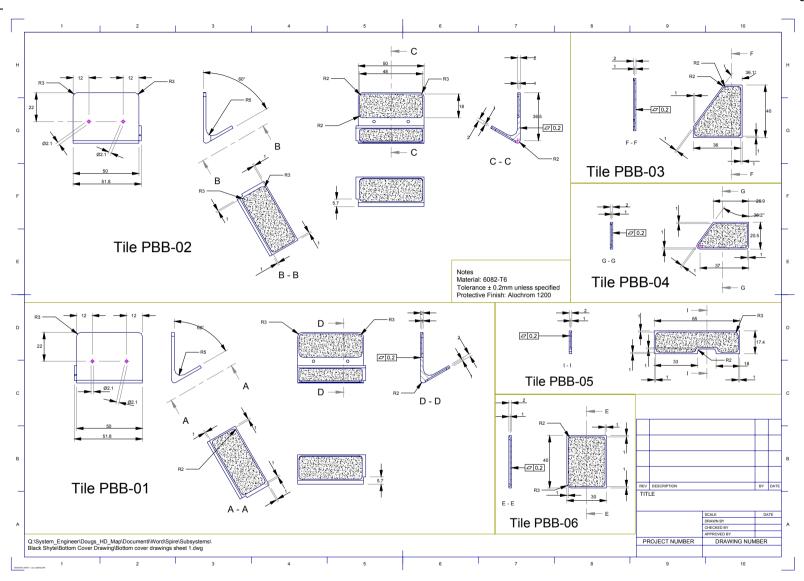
Photometer Detector Box Bottom Cover Tile detailed drawings
